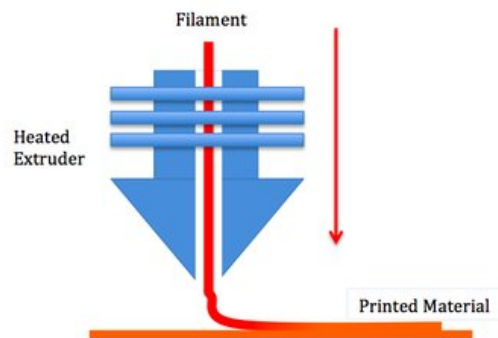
Exploded view of the mechanisms that drive FDM printing.
